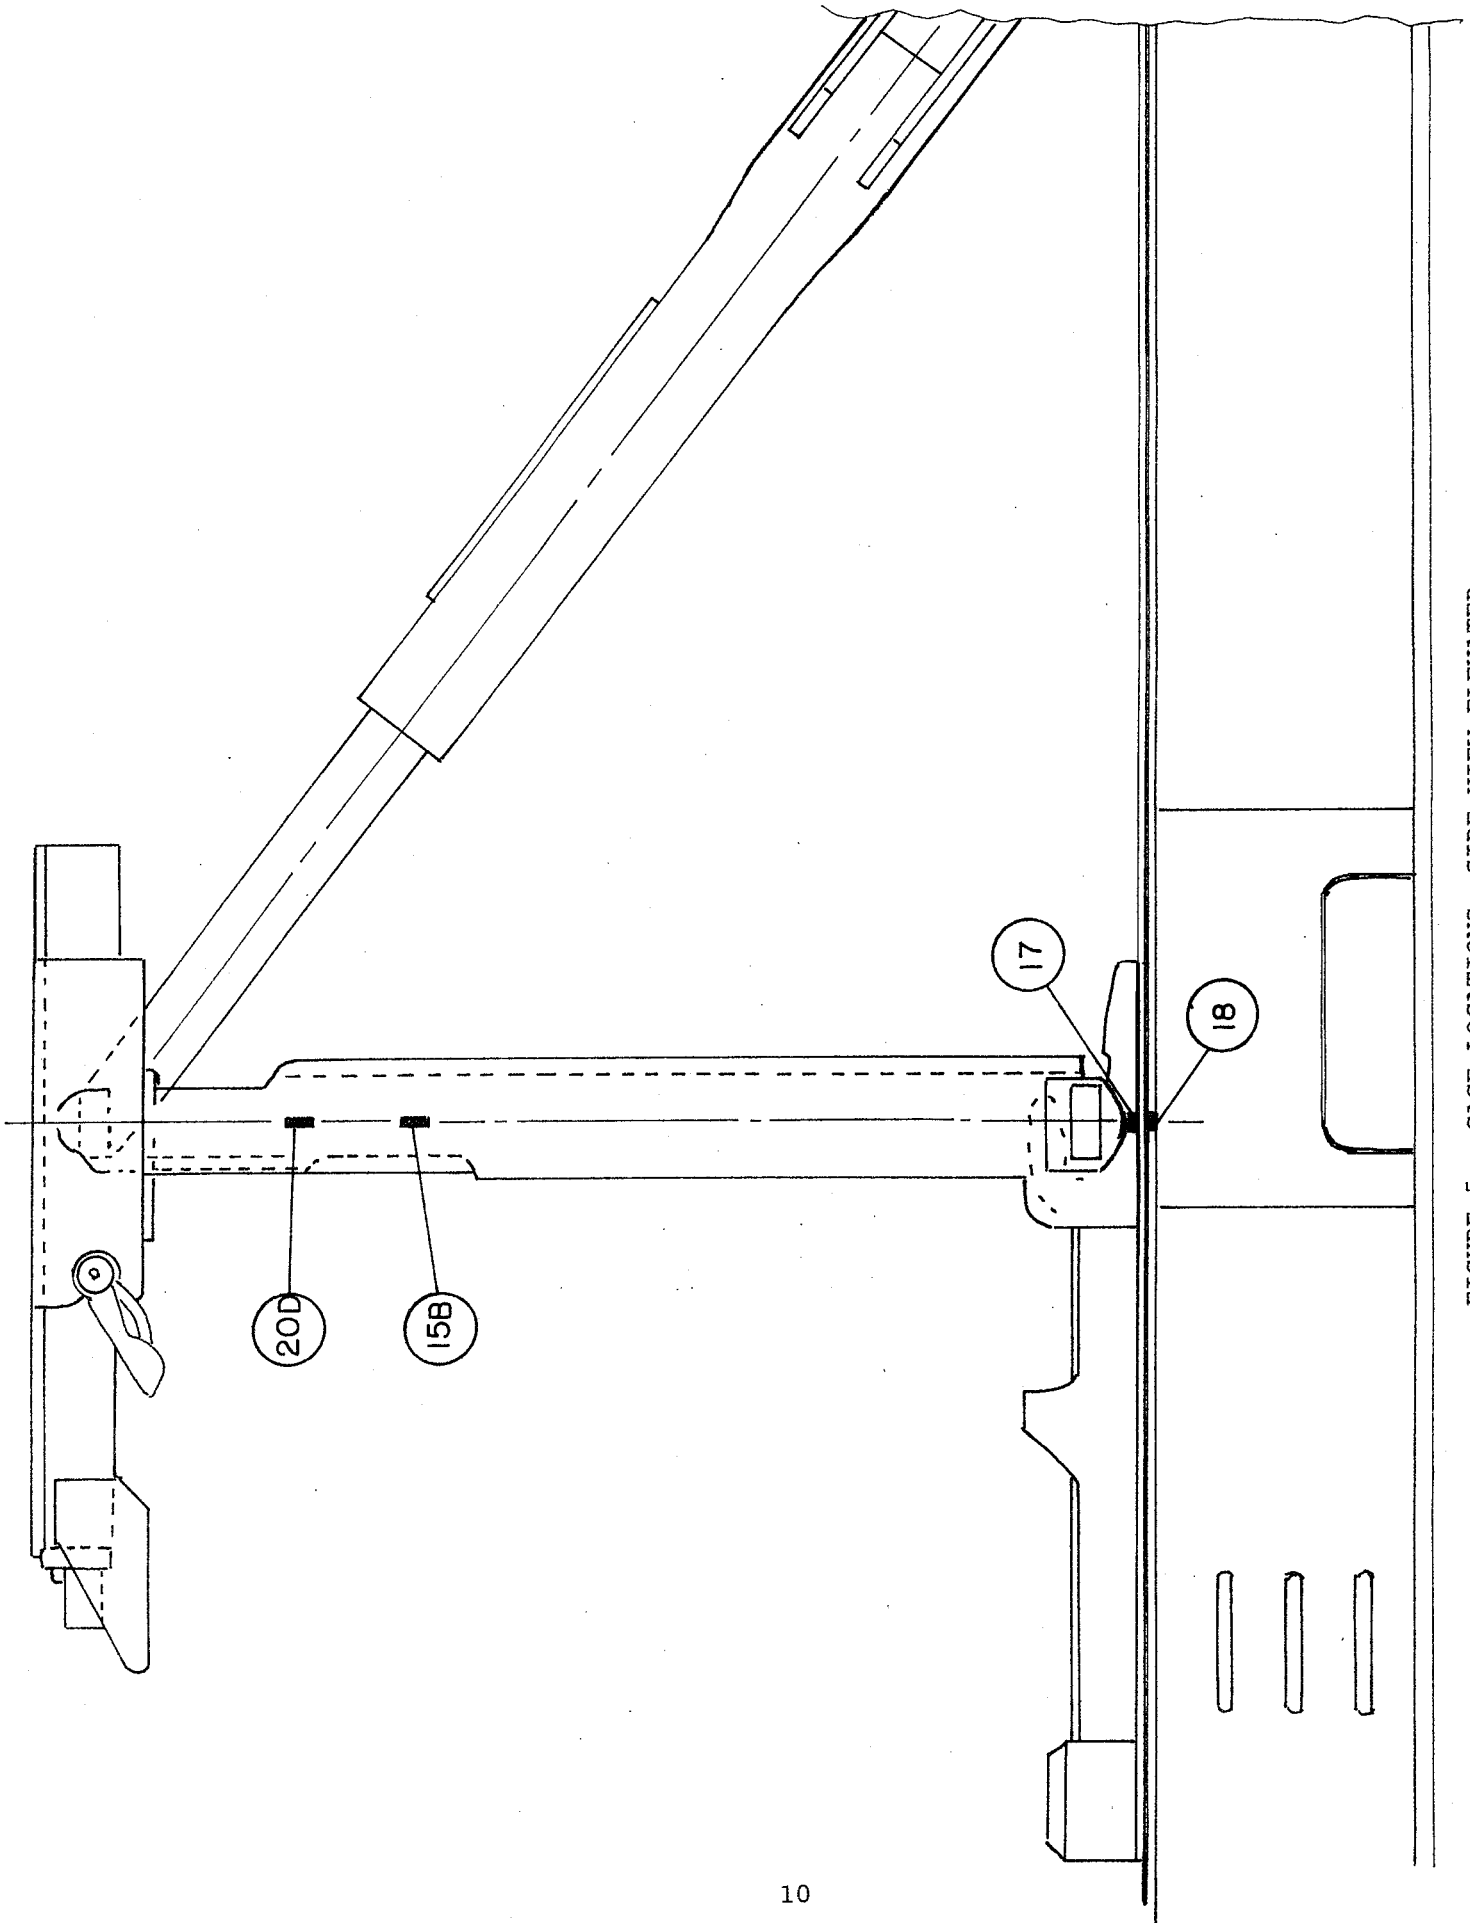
GAGE LOCATIONS, SIDE VIEW ELEVATED.
